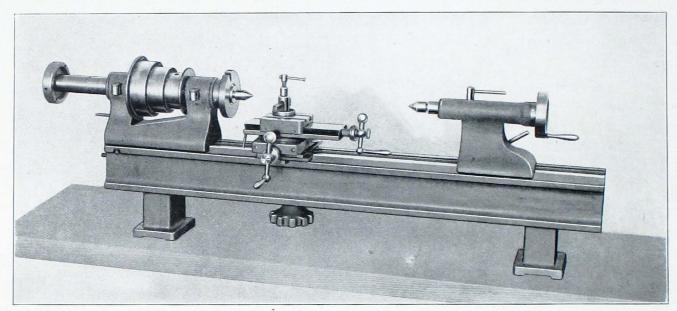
Rivett Junior Bench Lathe No. 507 with Bed, Headstock, Center and Center Chuck, Screw Draw-in-Spindle, Driving Plate, Tailstock, Compound Slide Rest, and Clamping Bolt.
